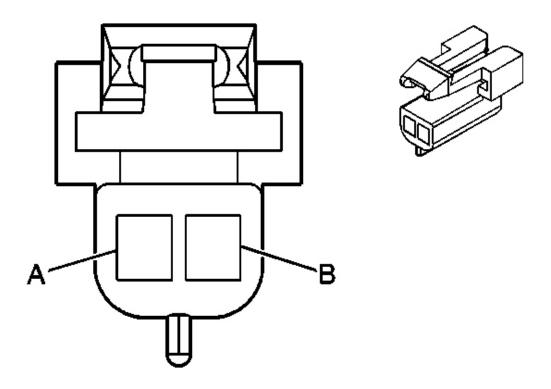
Speaker - Left Rear Door (UQ3) Connector End View Courtesy of GENERAL MOTORS CORP.
